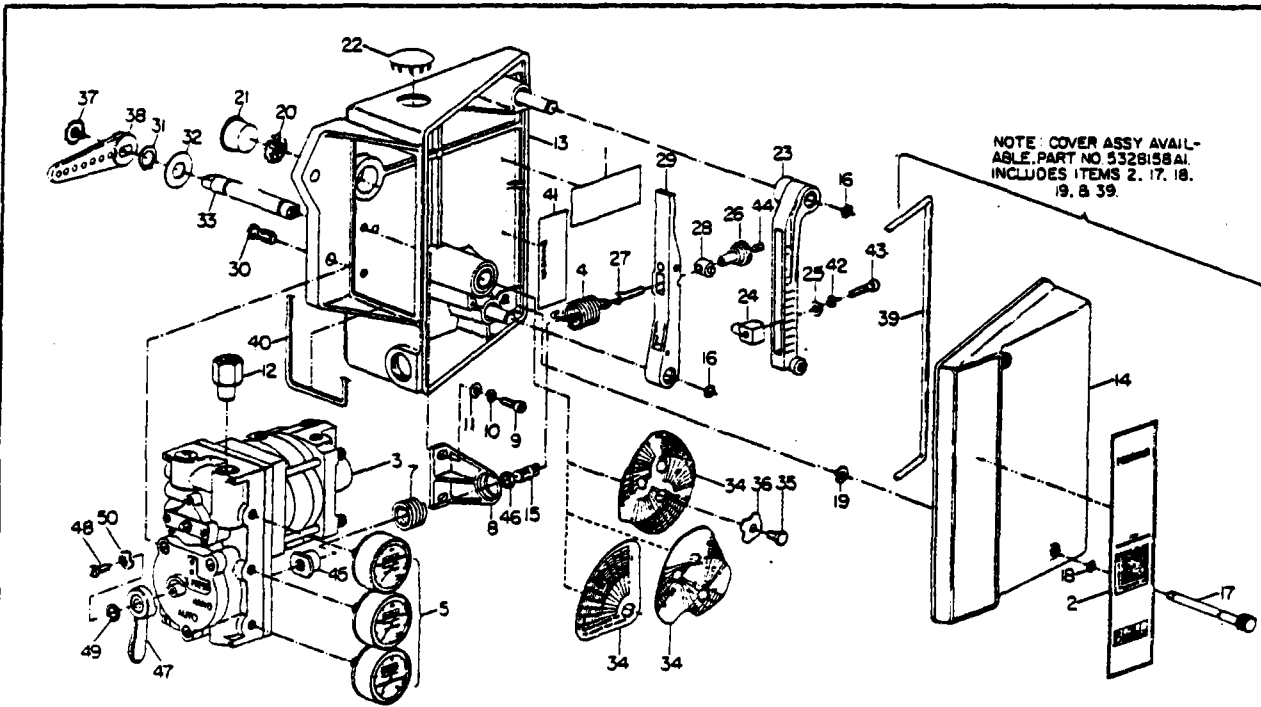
is a parts drawing of the Type AP2 Characterizable Pneumatic Positioner. Figure 23 is a parts drawing of the Positioner Assembly.
